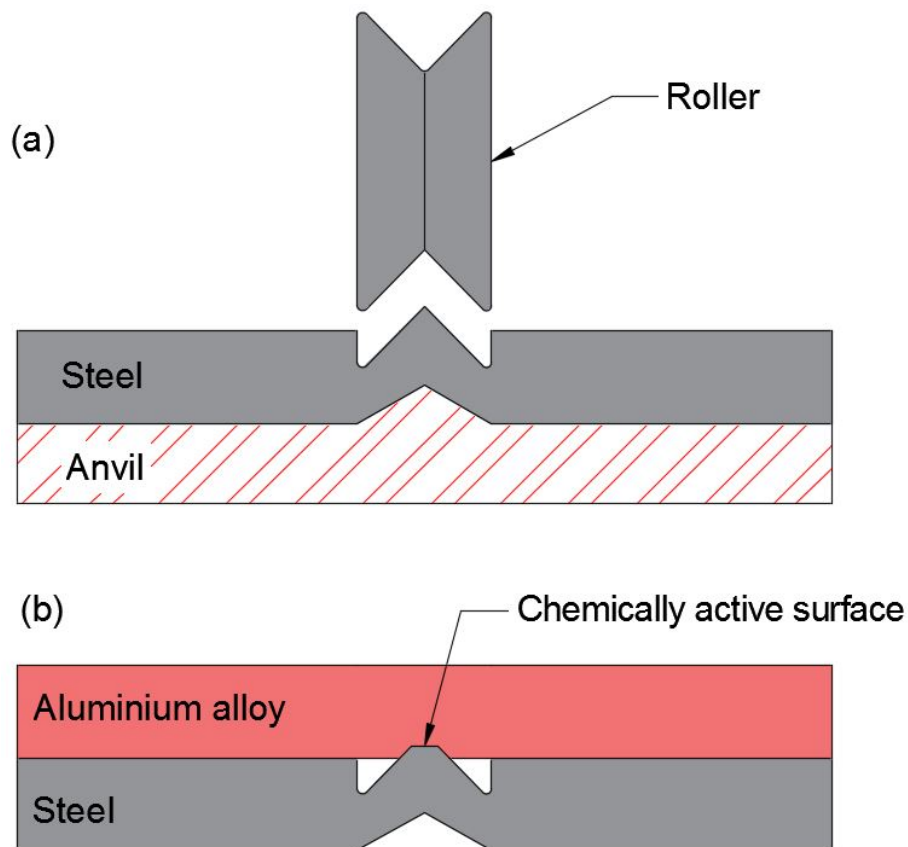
New lap joint concept for future development: (a) new geometry on steel sheet, (b) new lap joint concept.
